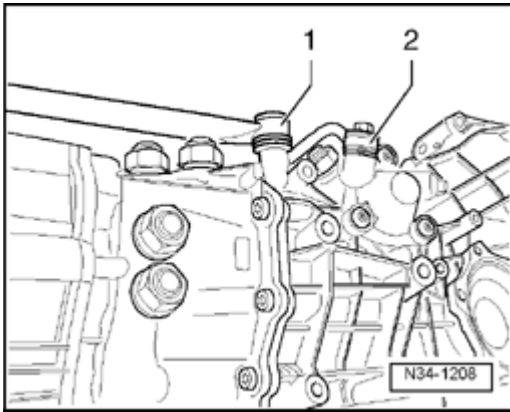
Identifying Push Rod And Connecting Rod For Selector Rod
